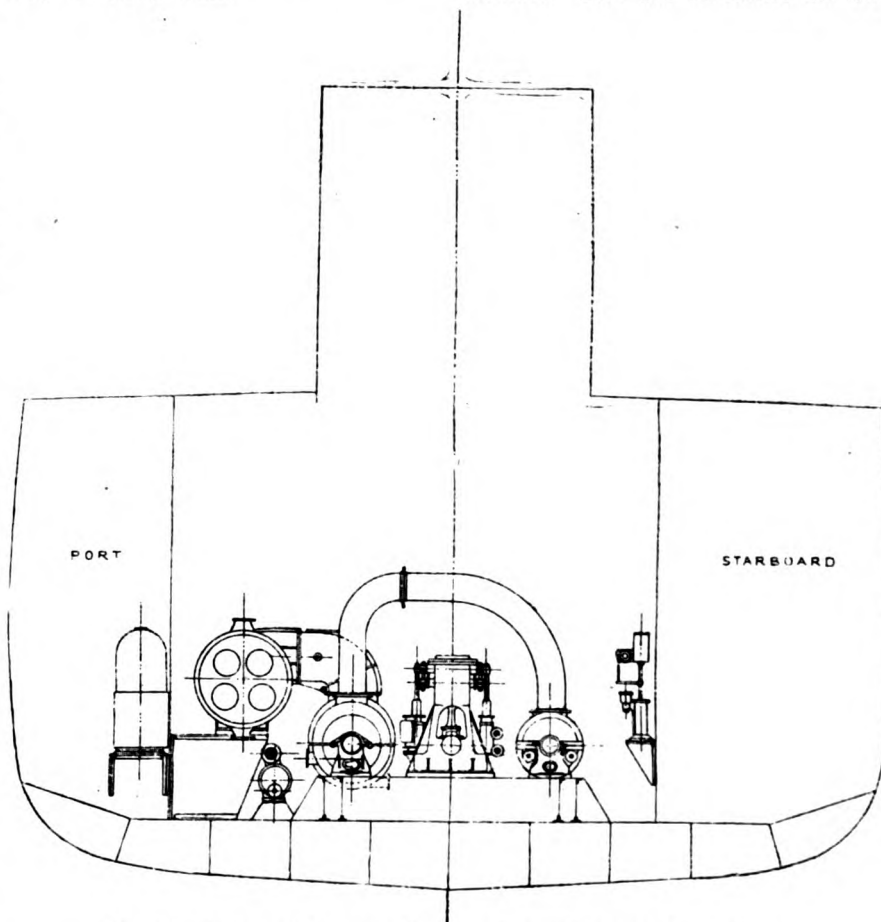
SECTION THROUGH ENGINE ROOM. TURBINE MACHINERY.
